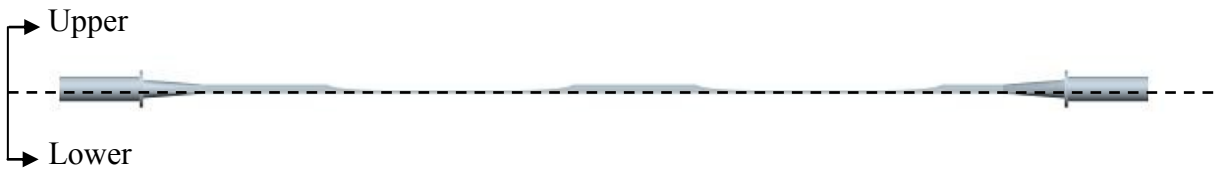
The design was split into two halves, the upper and lower and both halves were manufactured by CNC machining.
